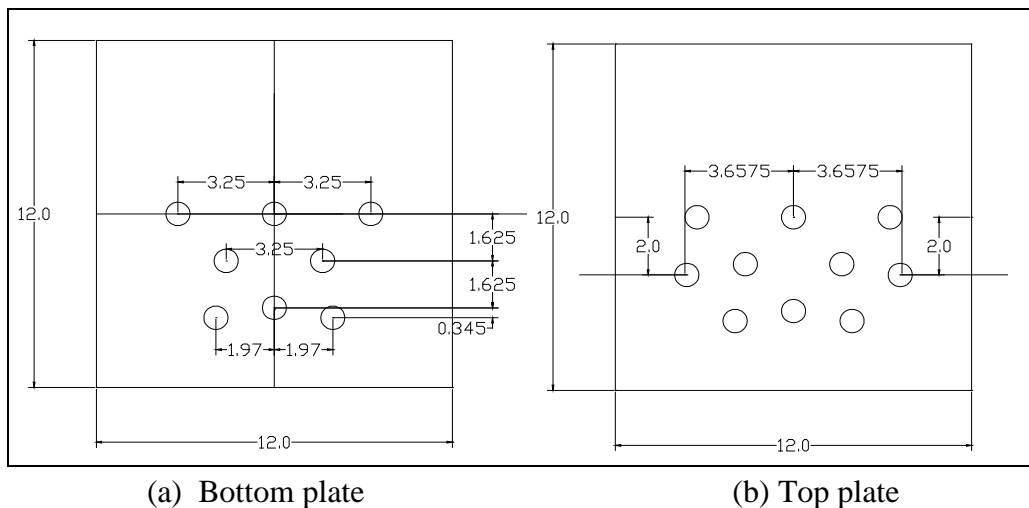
Steel fixture plates used to apply eccentric axial load on the specimens tested in compression-flexure (dimensions in inches).
